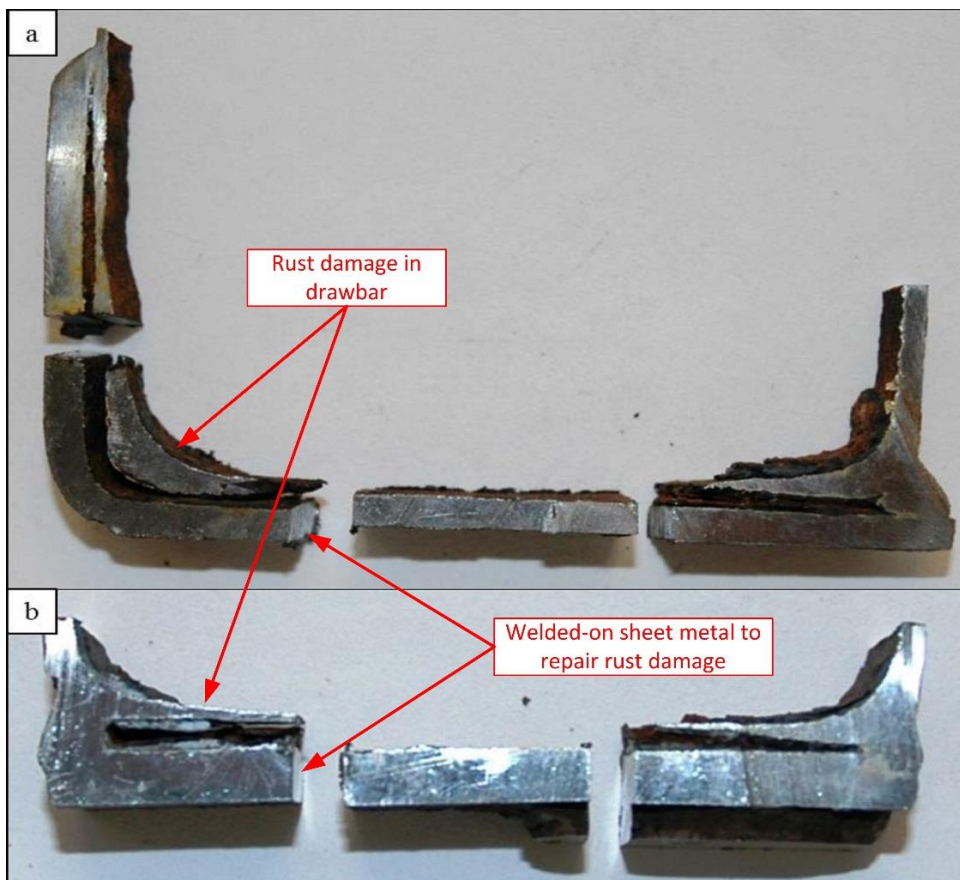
Cut-through section of the right (a) and left (b) drawbar rods in the area where pieces of sheet metal had been welded on during rust repairs. Photo: The Norwegian Defence Laboratories
